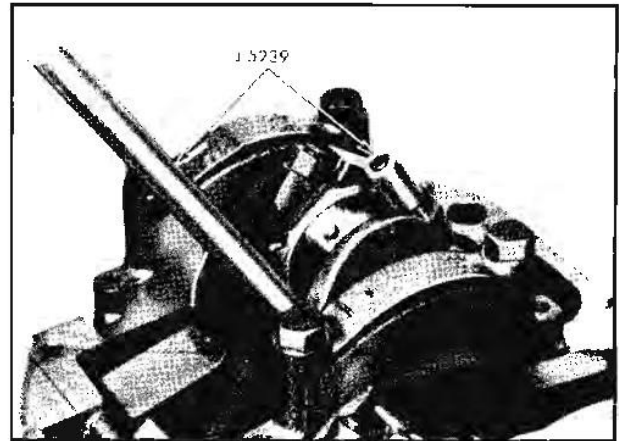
J-5239 Positioned for Removal of Rod Connecting Bearing Shell
